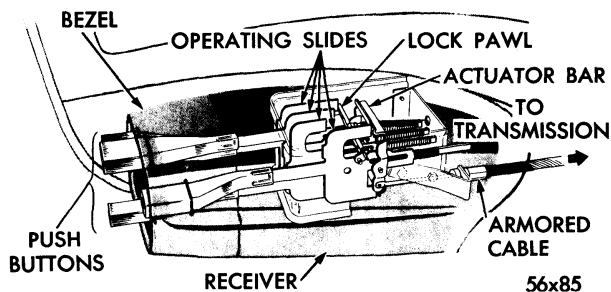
Push Button Control Unit (Phantom View) (Early Design)
